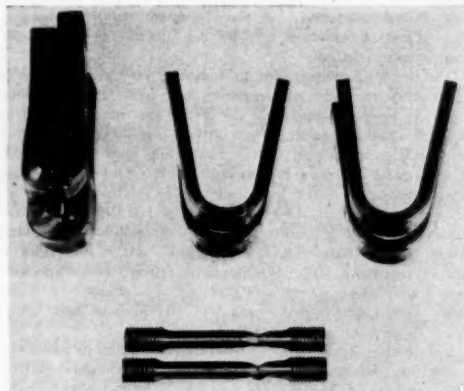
WELD QUALIFICATION TESTS ON CHROMIUM-MOLYBDENUM-VANADIUM STEEL
